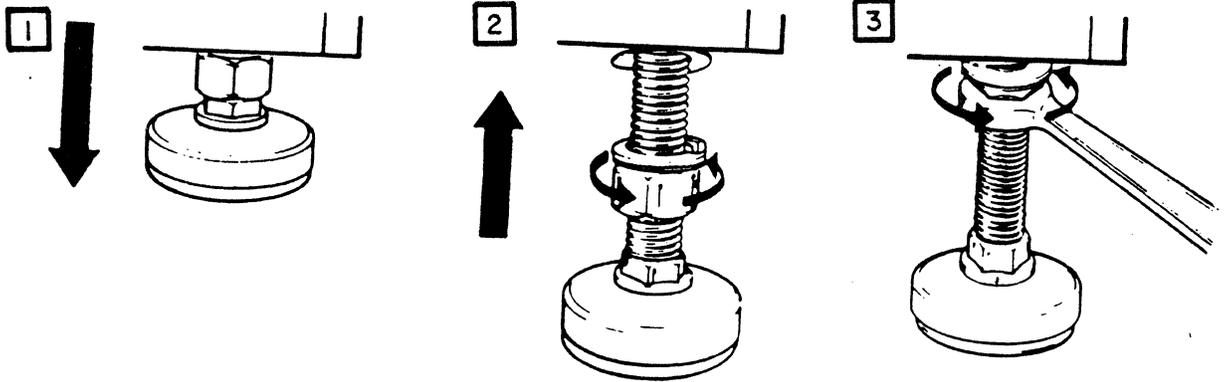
CABINET LEVELER FEET ASSEMBLY AND EXTENSION STABILIZER
